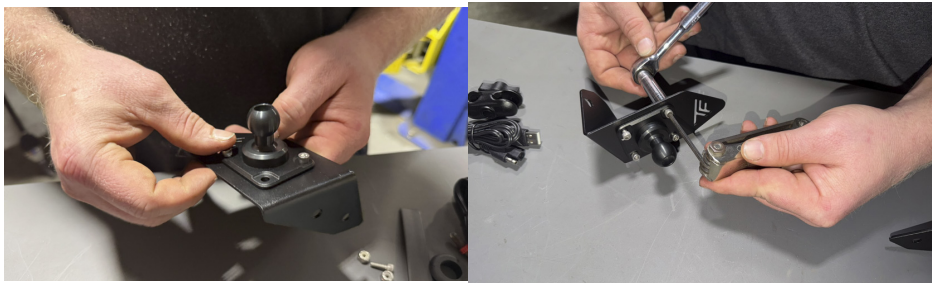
& FIG 2 - Fasten Ball Mount to Dash Mount Bracket
